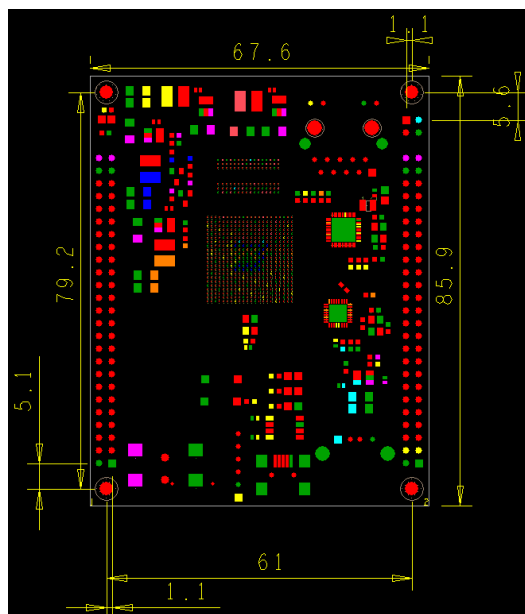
QMTECH ZYNQ XC7Z020 Starter Kit Dimension
